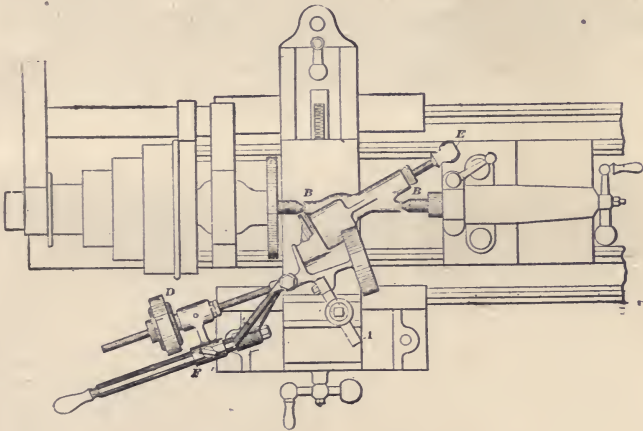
GRINDING LATHE-CENTER SPINDLES.
